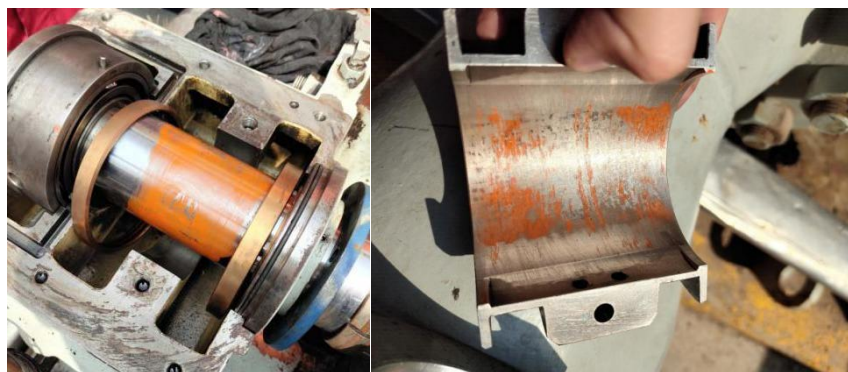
Inspect the contact surface of the bearing bush installation with red lead powder
